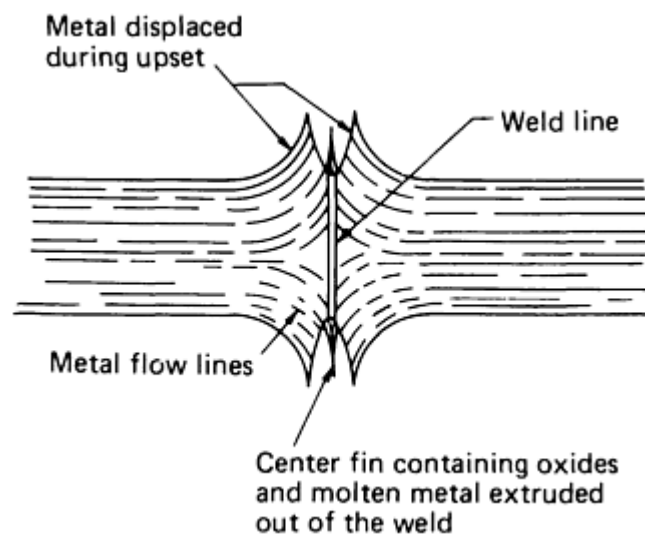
SCHEMATIC SHOWING CROSS-SECTIONAL VIEW OF TYPICAL PEAKS AND FLOW LINES GENERATED IN A FLASH WELD
